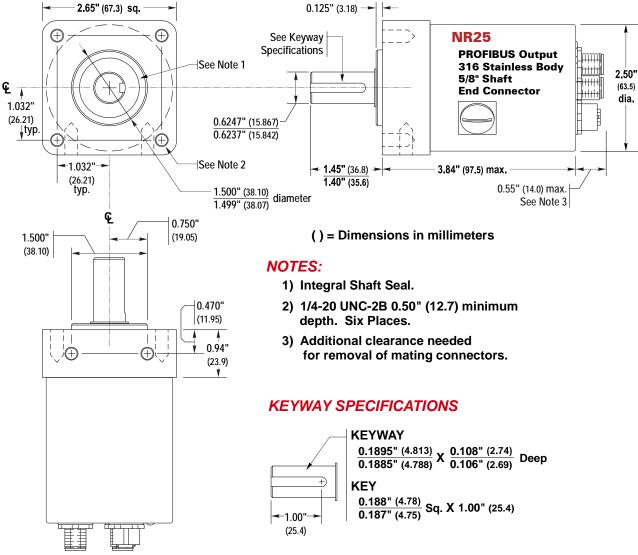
5/8" Shaft, Flange Mount, End Connect Outline Drawing
